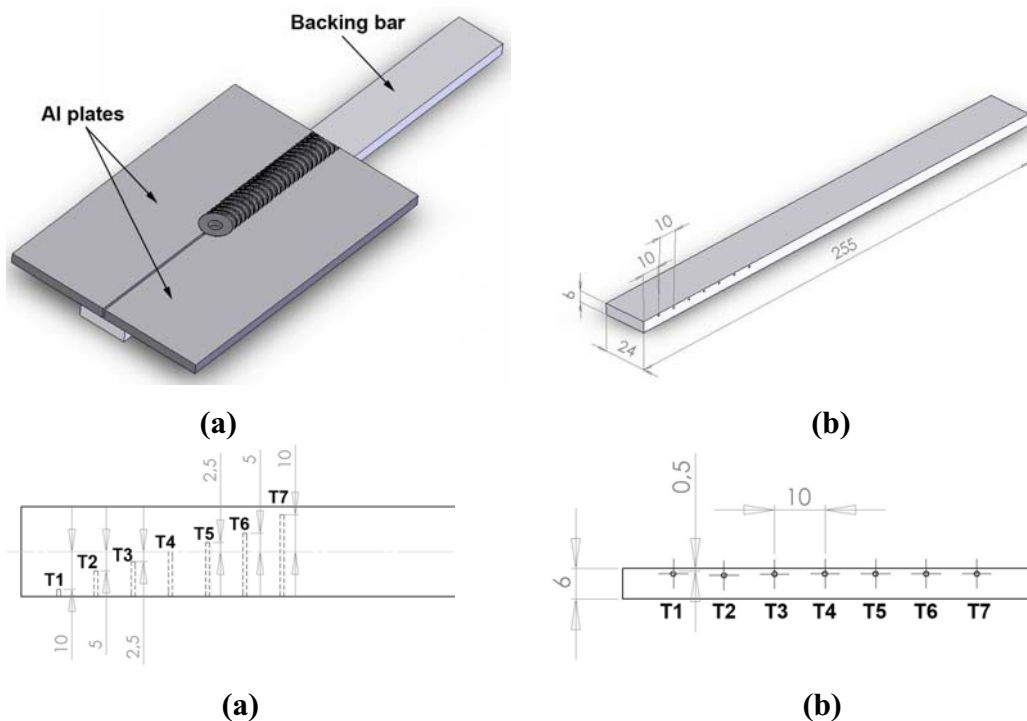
Schematics of the the temperature measurements in the backing bar showing the location of the thermocouples (distance in mm). (a) Assembly of backing bar and weld plates, (b) backing bar, (c) top view and (d) side view.
